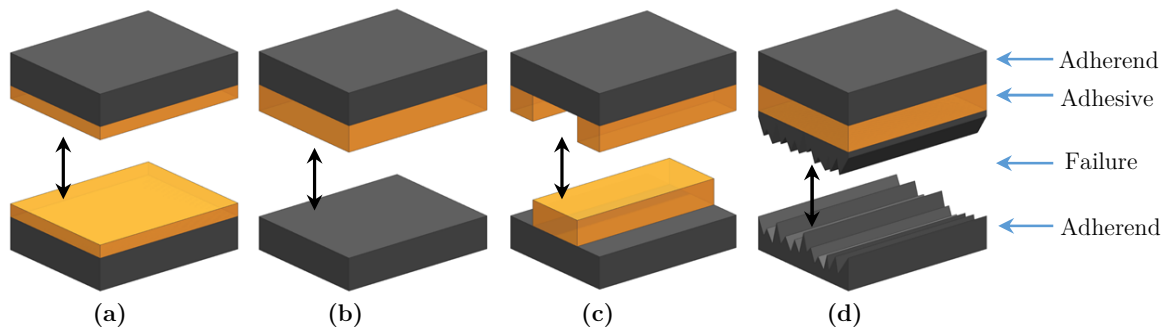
Failure modes in adhesive bonded joints; (a) cohesive failure; (b) adhesive failure; (c) mixed failure; (d) adherend failure
